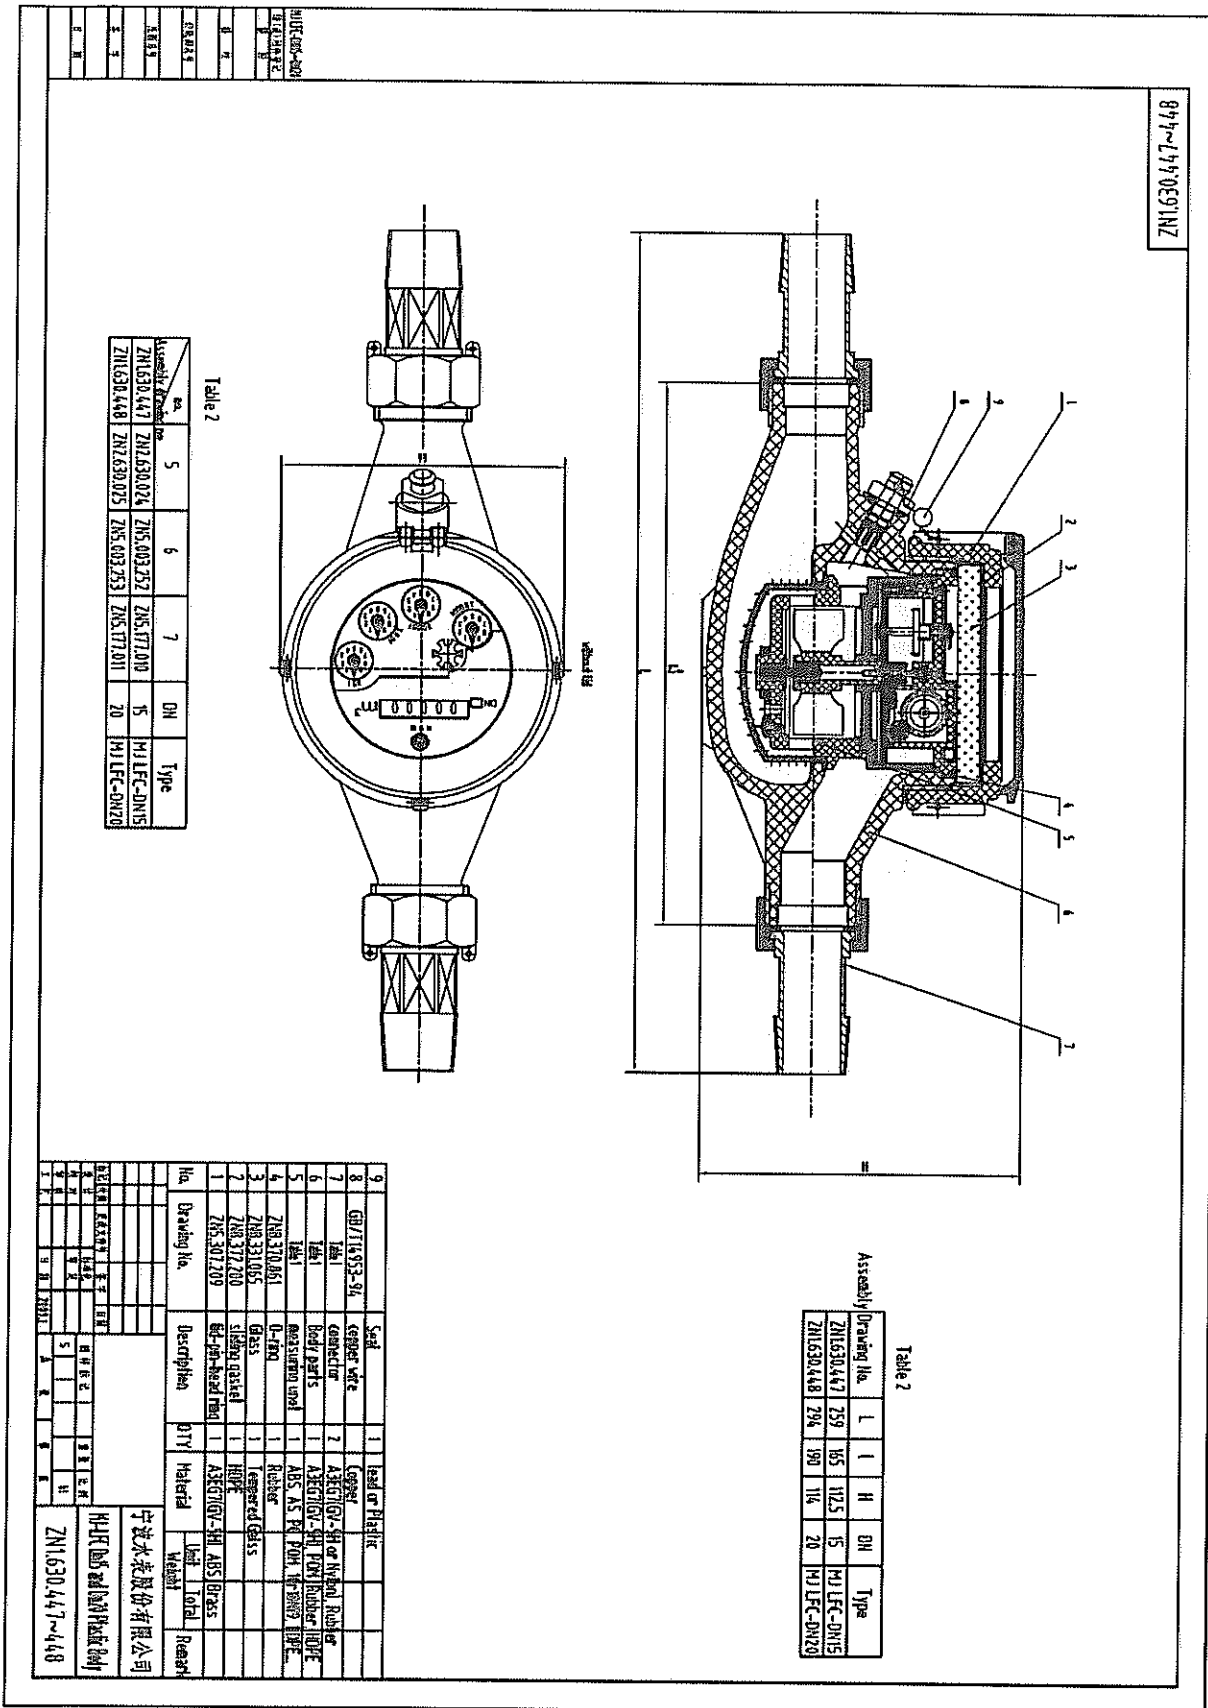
The water meter type MJ-WDC with plastic body assembly drawings:
